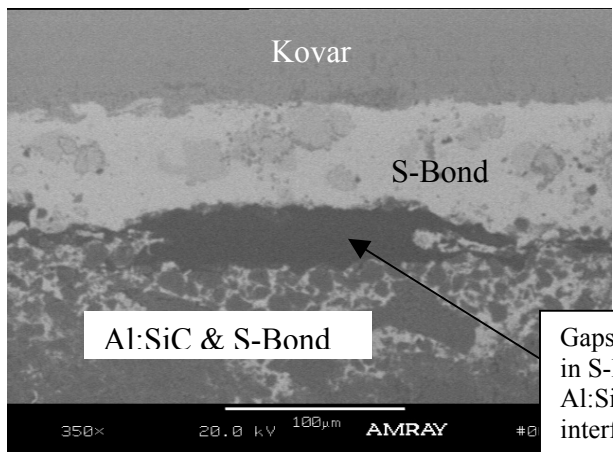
High magnification view of Al:SiC/Kovar® joint in an electronic package assembled using S-Bond™ 220.
